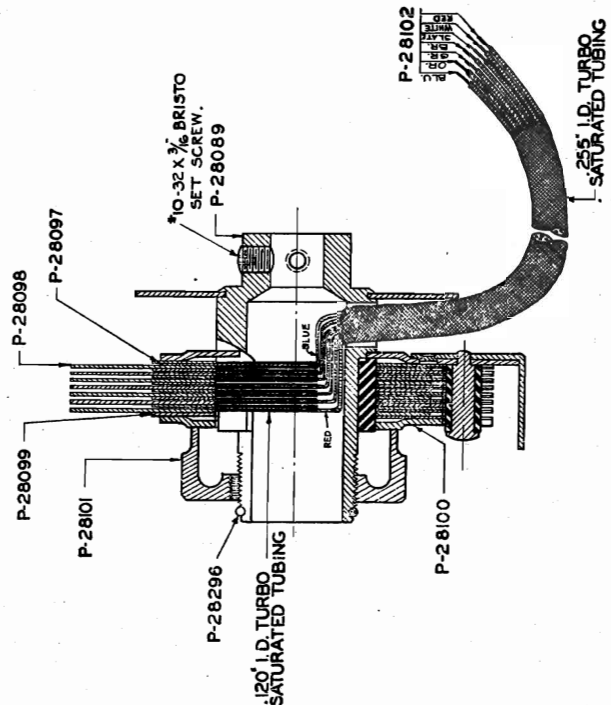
Section View of Flash Tuner Contactor Assembly.
